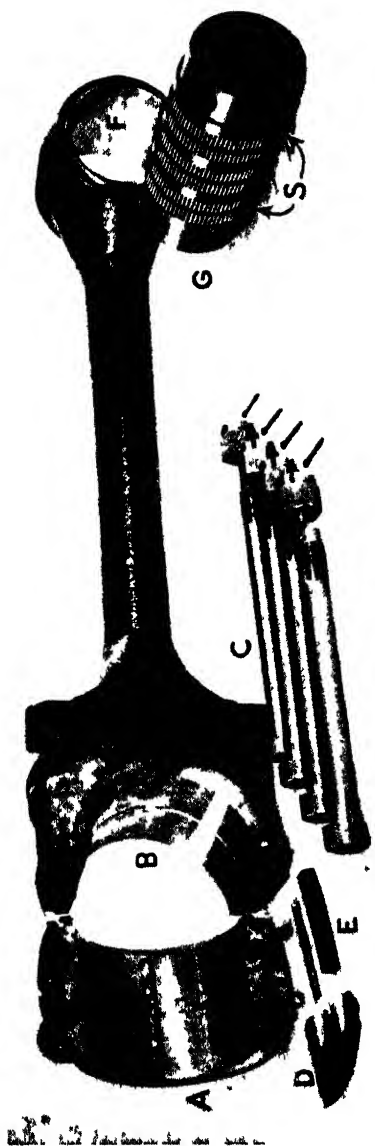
Fairbanks Morse rod with babbitted crank bearing and needle bearing for the piston pin
